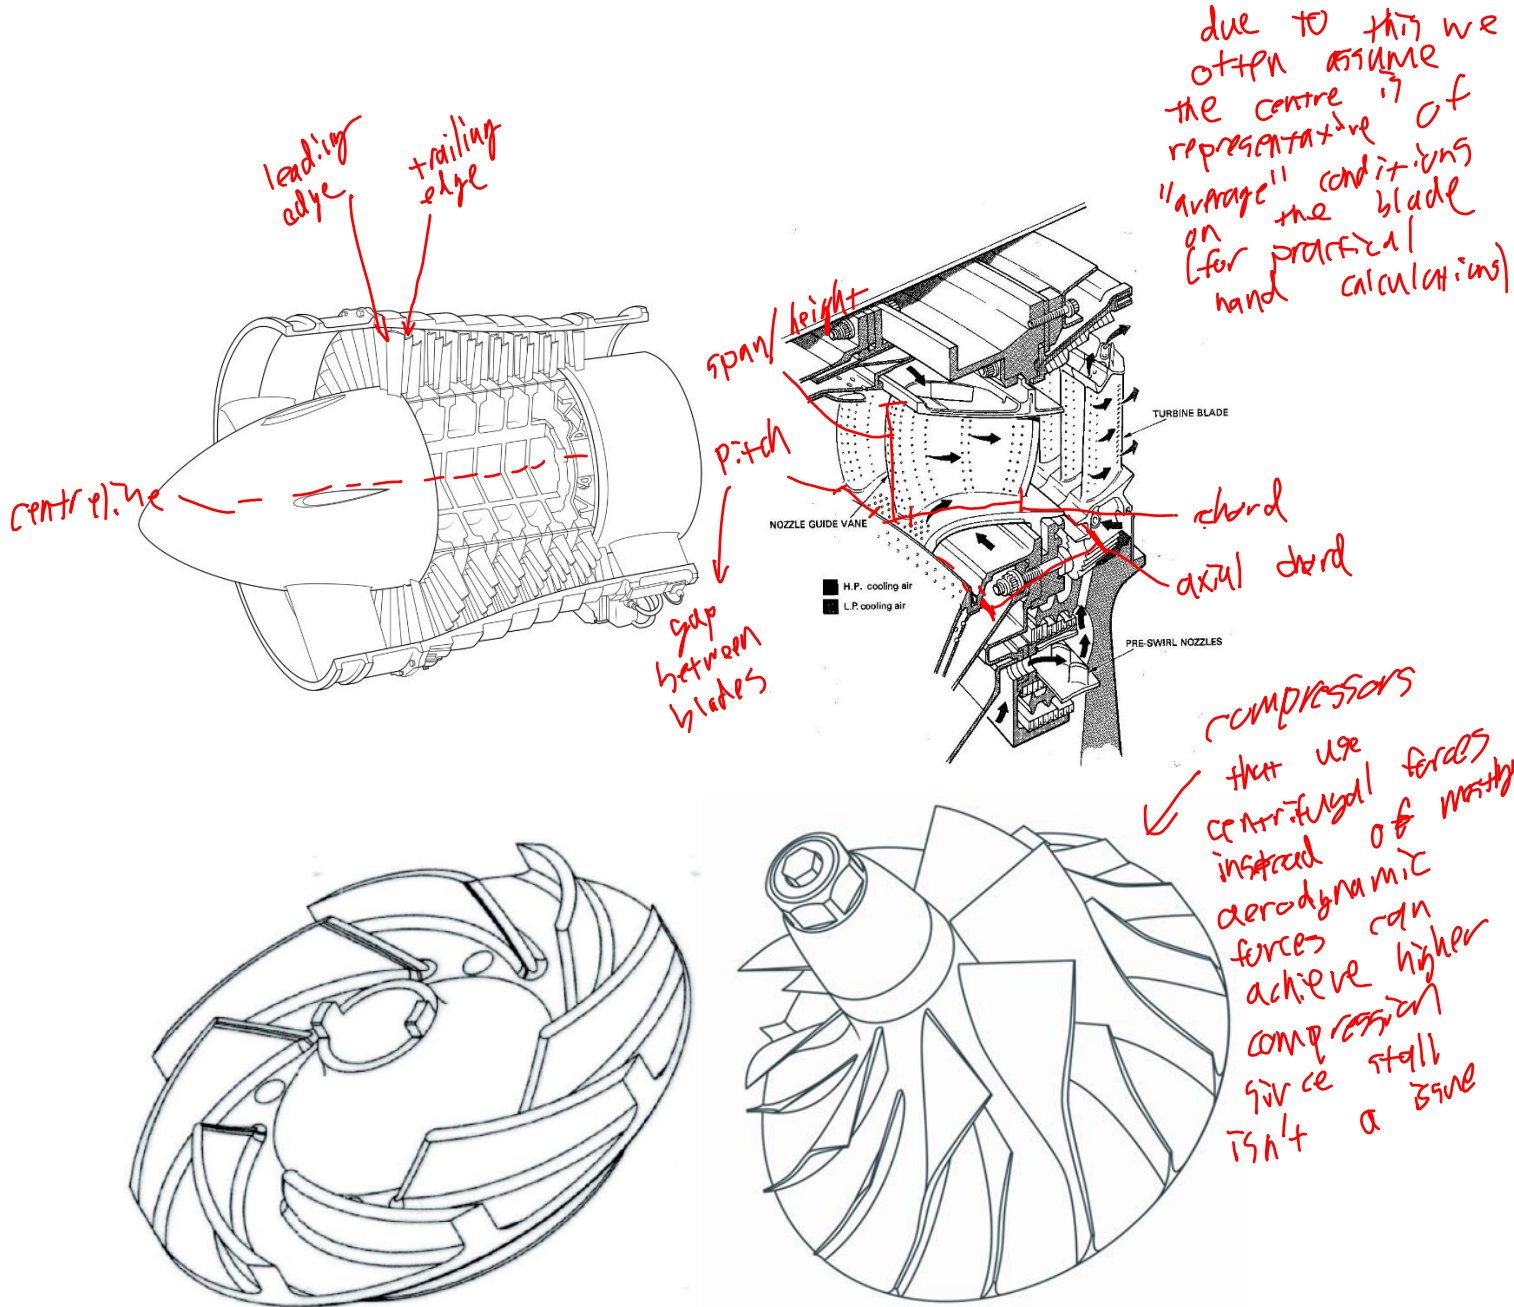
Multi-stage axial compressor; High pressure axial turbine stage (nozzle guide vane and first rotor); liquid-oxygen rocket pump impeller; turbocharger impeller.
